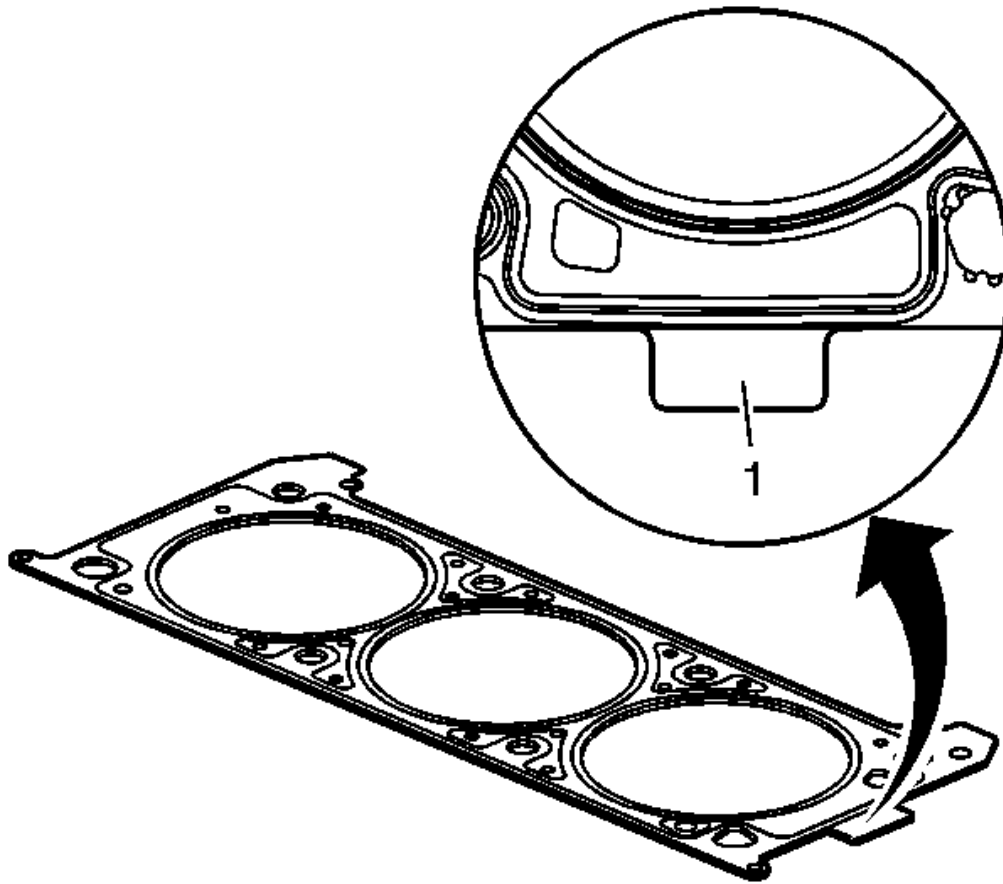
Identifying Proper Cylinder Head Gasket Installation
